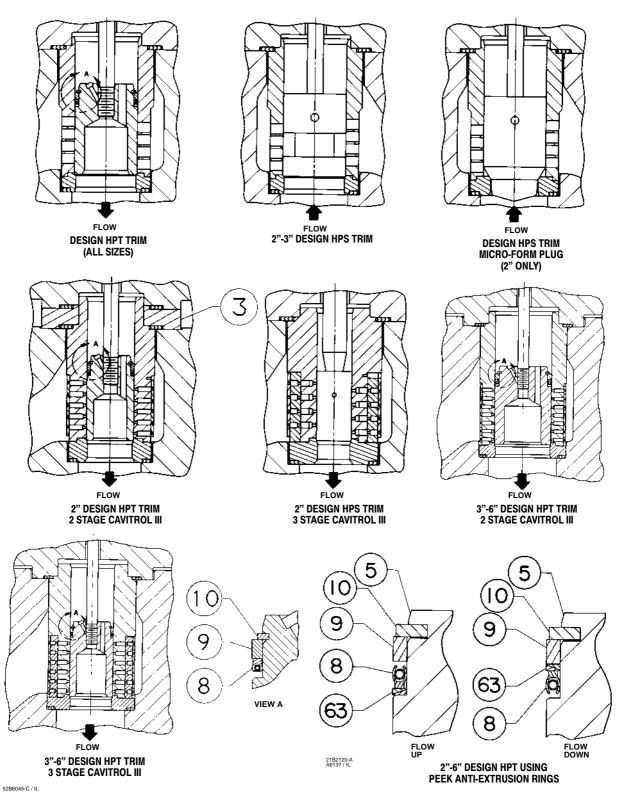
Size 2-6 Design HP Valve - Alternate Configurations
